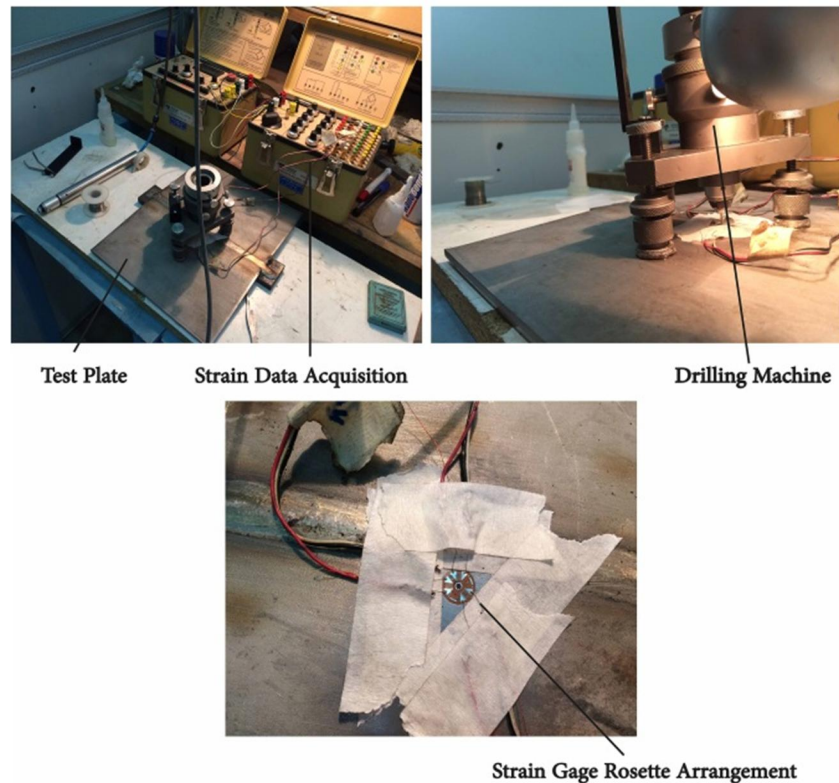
Measurement of welding residual stress by hole-drilling strain-gage method
